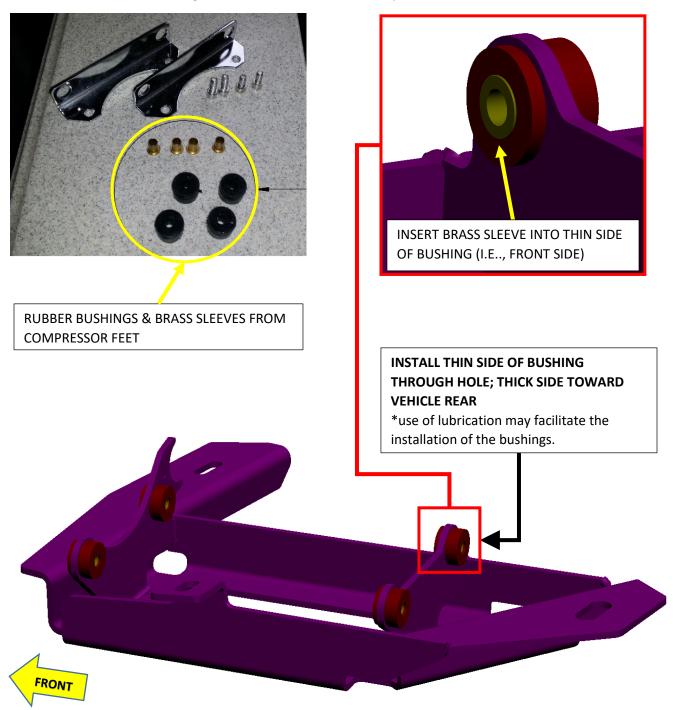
Air Compressor Bracket with Rubber Grommets Installed
